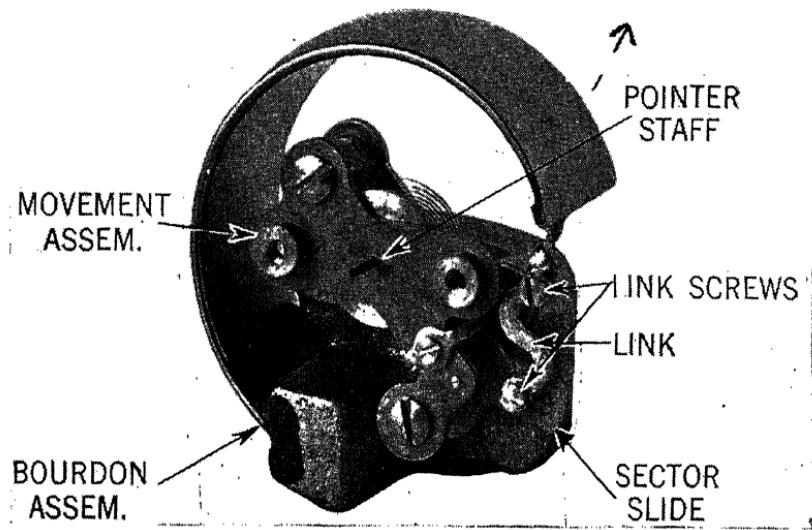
Mechanism of Ashcroft Fuel Pressure Gauge (Vented Type)
